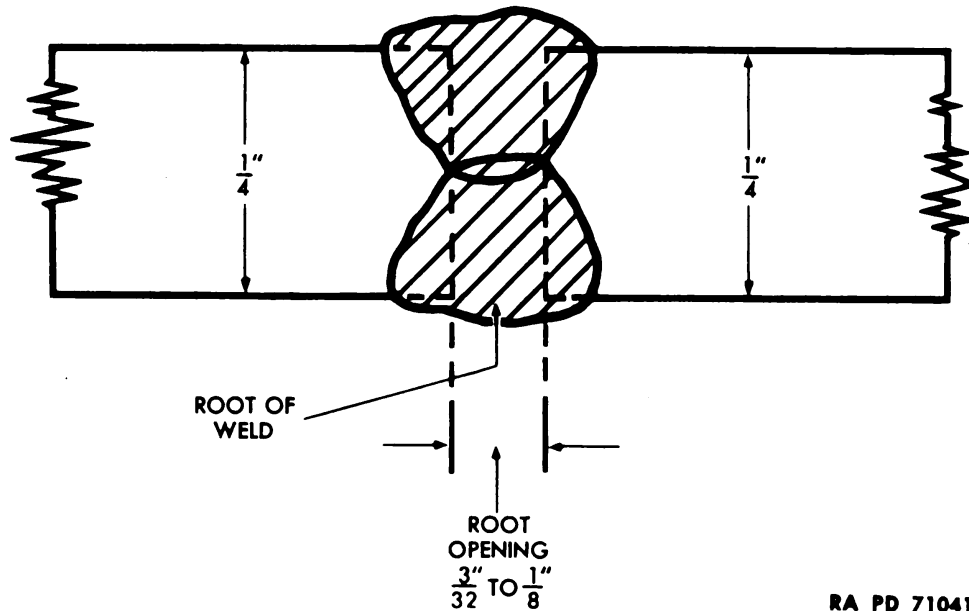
Butt Weld in Flat Position without Edge Preparation ($\frac{1}{8}$ - to $\frac{1}{4}$ -in. Plate)
